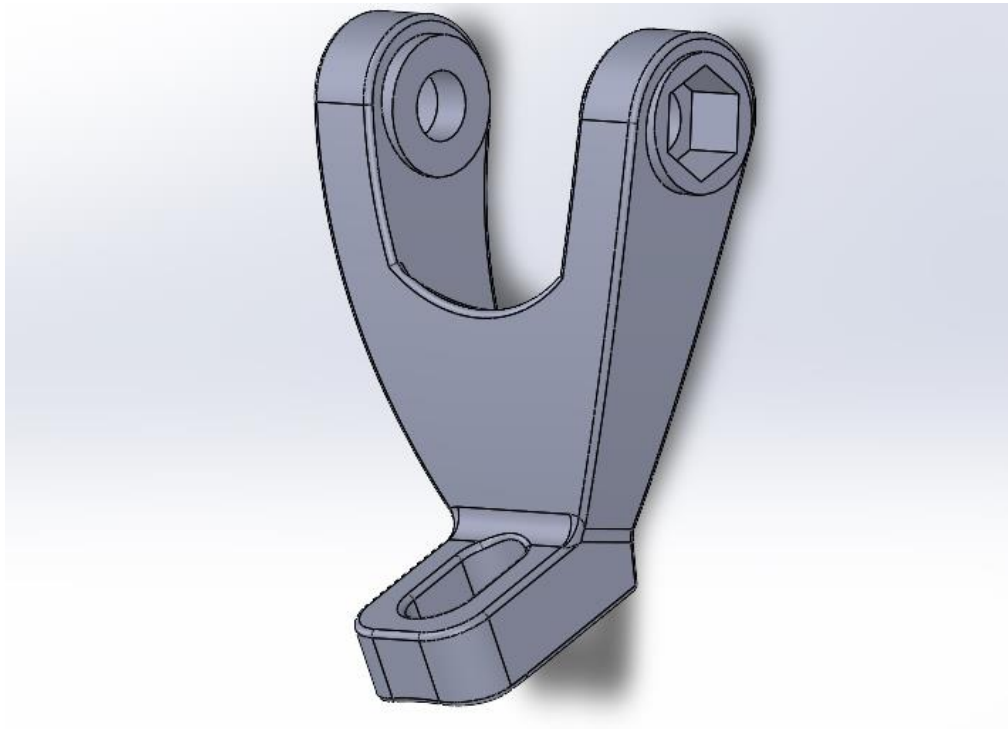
CAD model of the original bicycle headlamp mounting bracket
